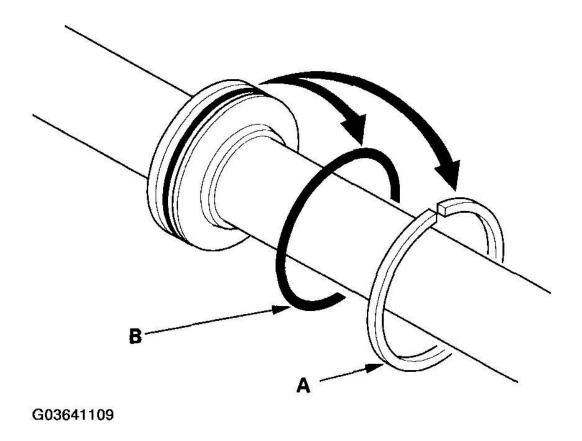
Prying Piston Seal Ring And O-Ring Courtesy of AMERICAN HONDA MOTOR CO., INC.
